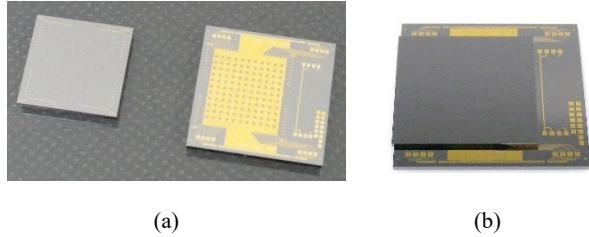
The photographs of the test chip and the interposer; (a) before fabricating gold stud bumps and (b) after flip-chip bonding.
